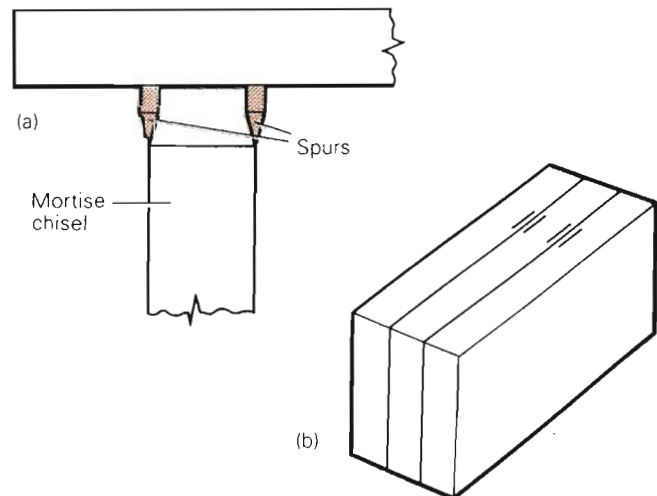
Setting and using mortise gauge: (a) setting, (b) using the gauge.
